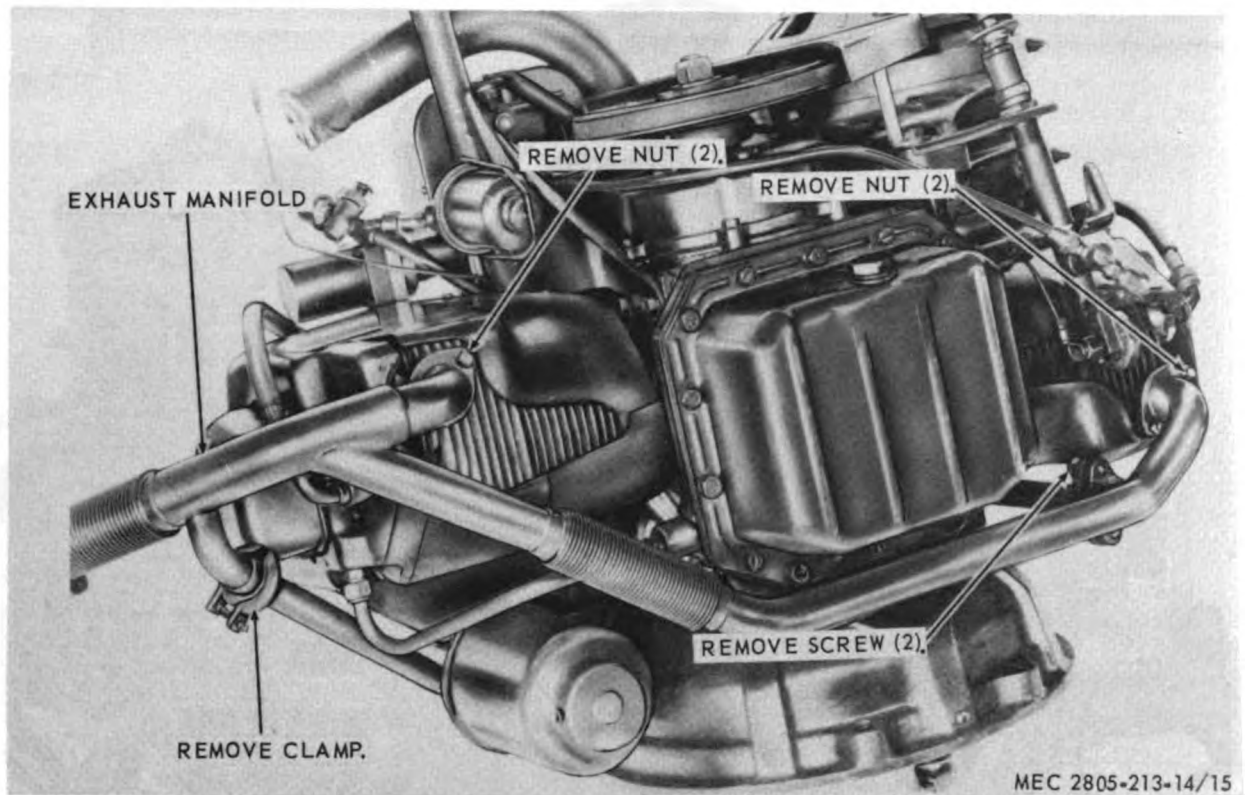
Exhaust manifold, removal and installation (Model AO42-KM).
